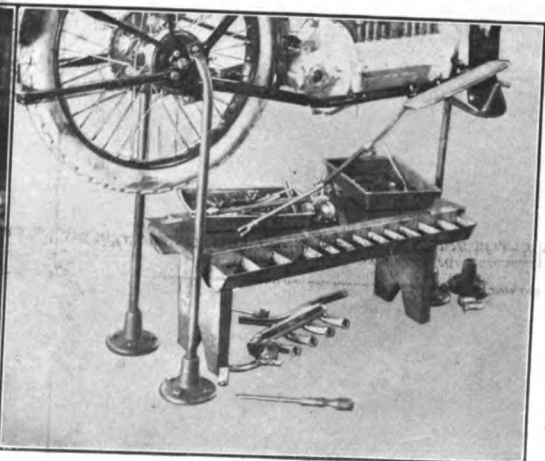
ASSEMBLING STAND AND PARTS HOLDER
